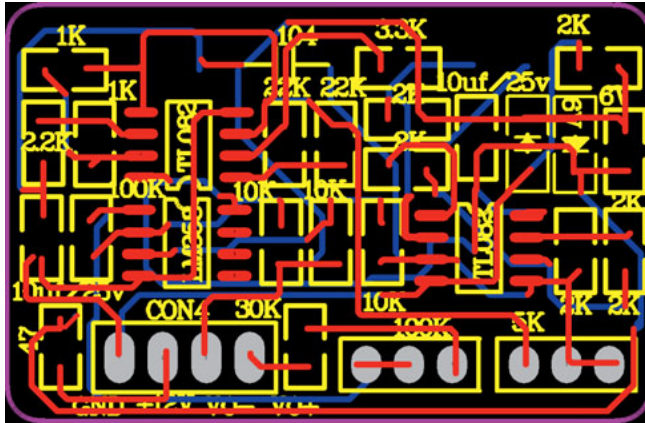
Printed circuit board (PCB) diagram of the CCFM module
